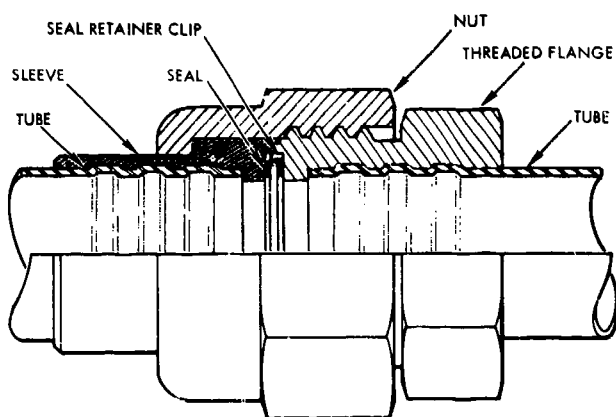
Astro-Weight Connector Showing Tube-to-Tube Connection
